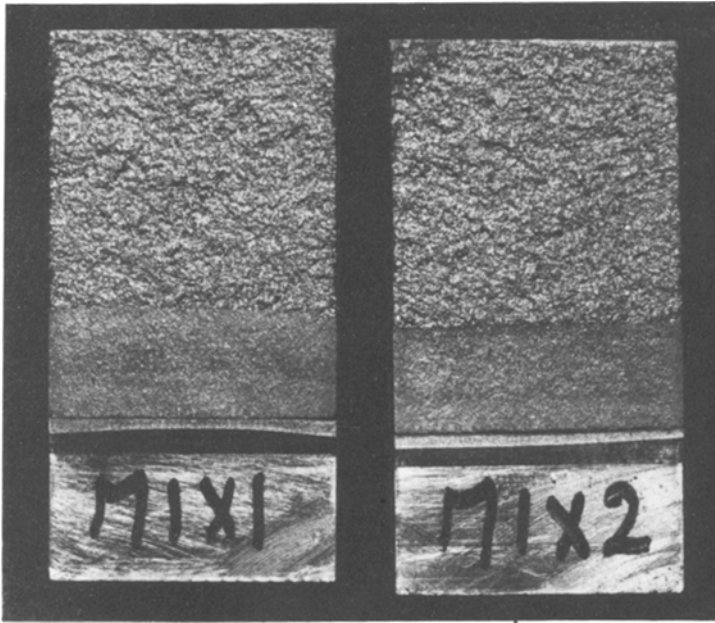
Fracture surfaces for 25 mm thick specimens of steel M.
